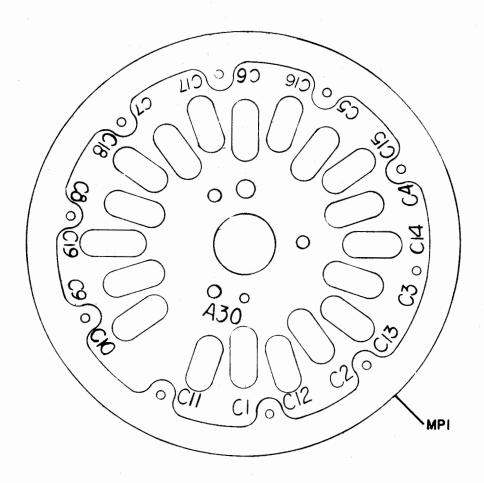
100 kHz Rotor Subassembly A2A4A30, Component Locations
